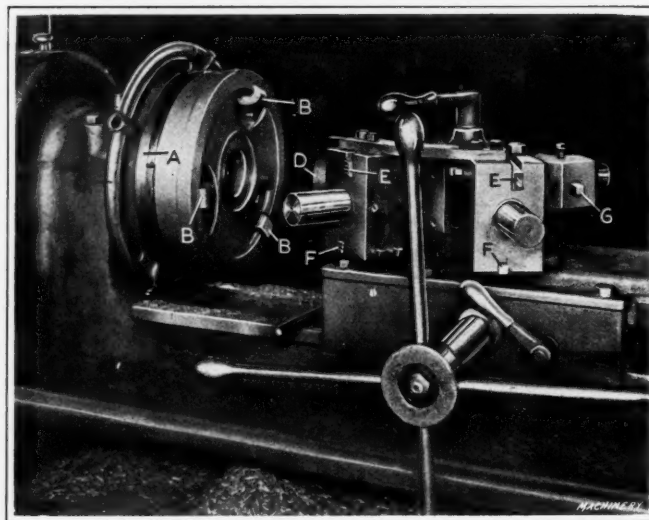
No. 6 Warner & Swasey Turret Lathe tooled up for facing and counterboring Crankshaft Flange Fit in Flywheels and facing Rim around Flange Fit
